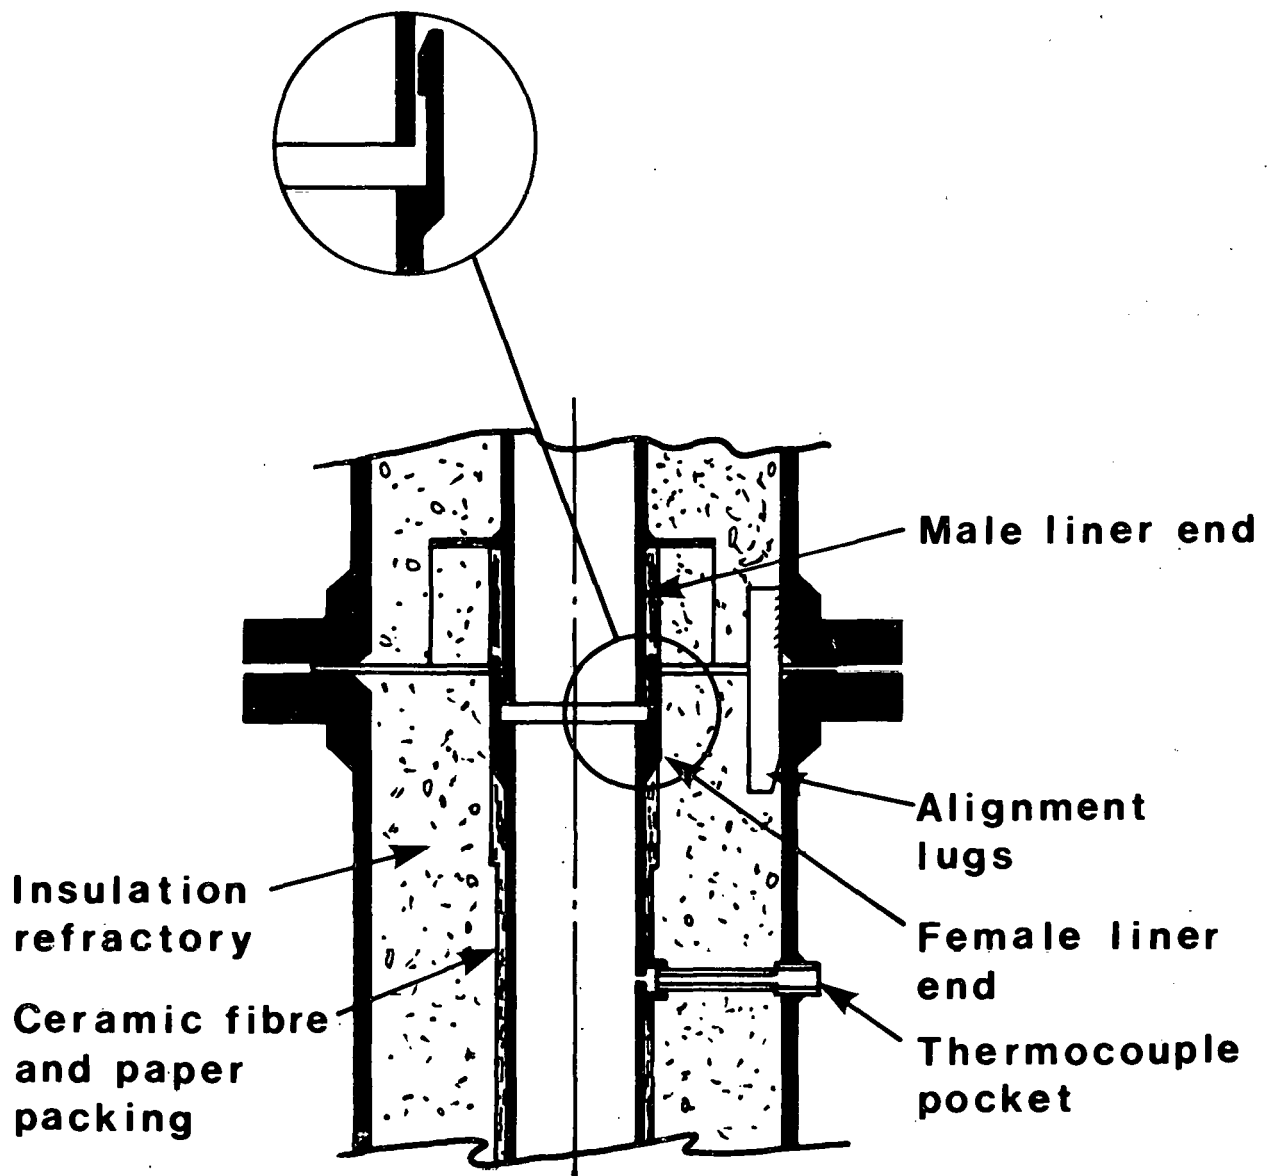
Typical sliding joint in metal-lined ducting up to cascade test section.
